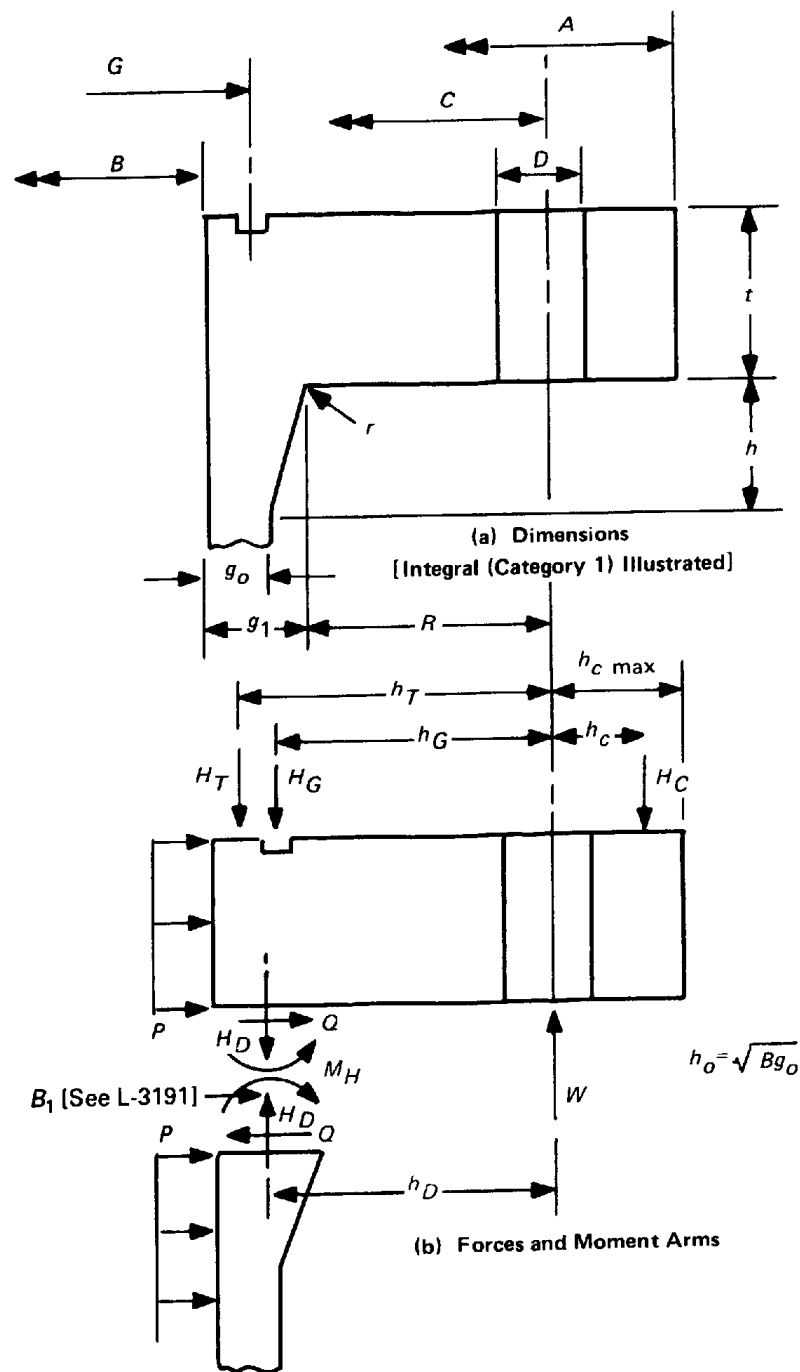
FLANGE DIMENSIONS AND FORCES
